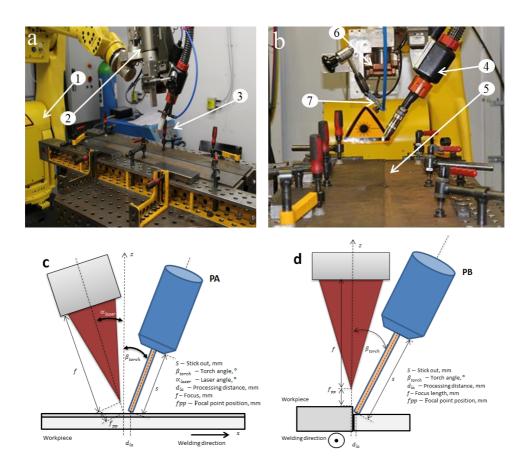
(a, c) HLAW at the PA position; (b, d) HLAW at the PB position. Experimental equipment elements used for welding: 1 – industrial robot Fanuc; 2 – Precitec laser head; 3 – CLOOS GLC 403 Quinto arc source; 4 – MAG torch; 5 – workpiece; 6 – first cross-jet; 7 – second cross-jet.
